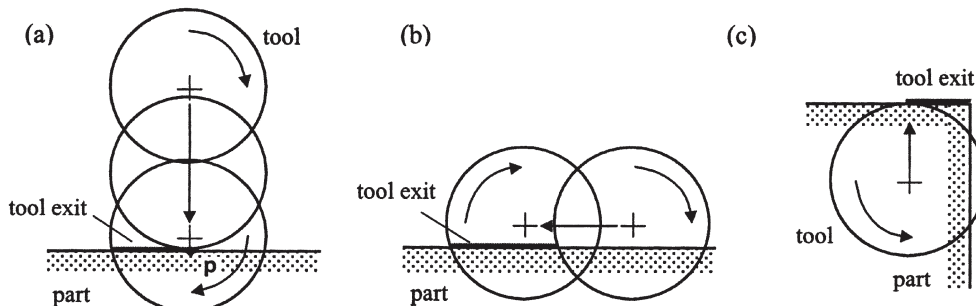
Three tool exit conditions: (a) the tool enters the workpiece along a straight line; (b) the tool moves along an edge; (c) the tool encounters an adjacent edge
